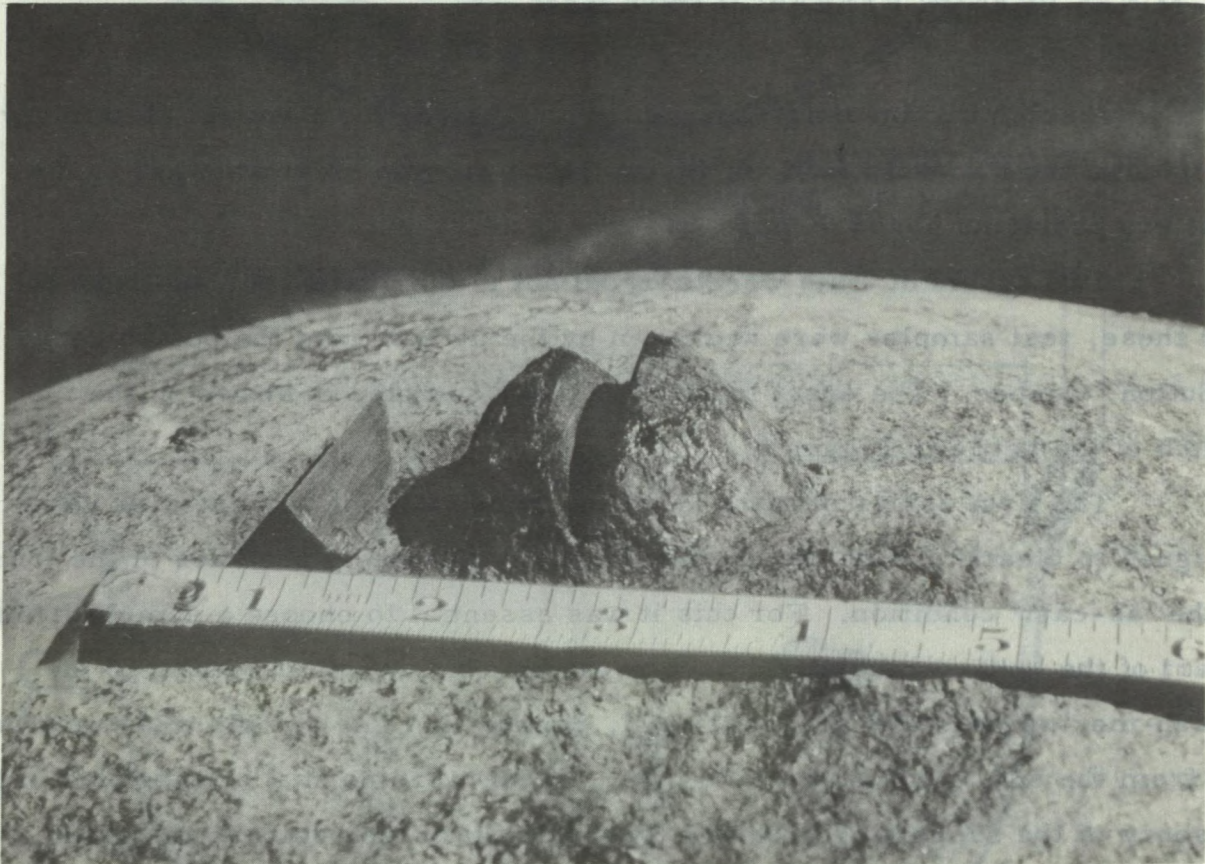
MOULDED BOSS ON KETTLE BOTTOM WITH SAMPLE REMOVED
